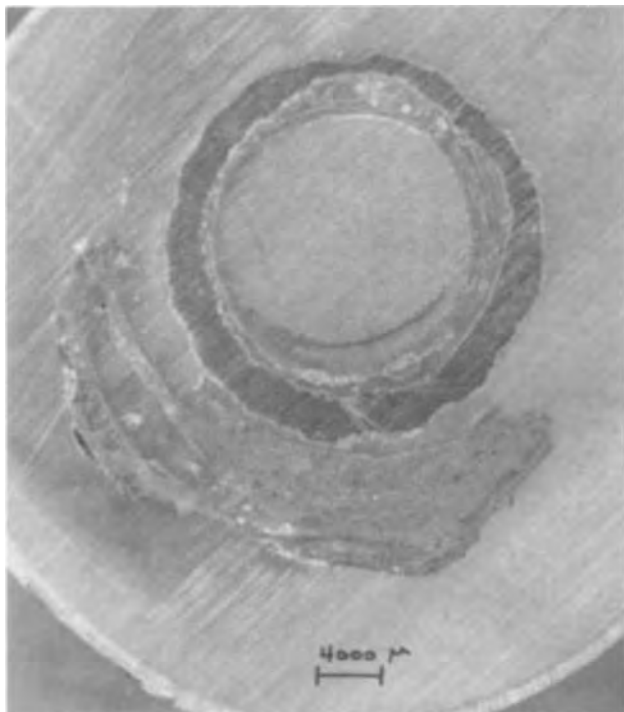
Corroded assembly of 316L SS: inner circle rest of corroded tube, surrounded by partially corroded ring, and lower outside part of corroded plate.
